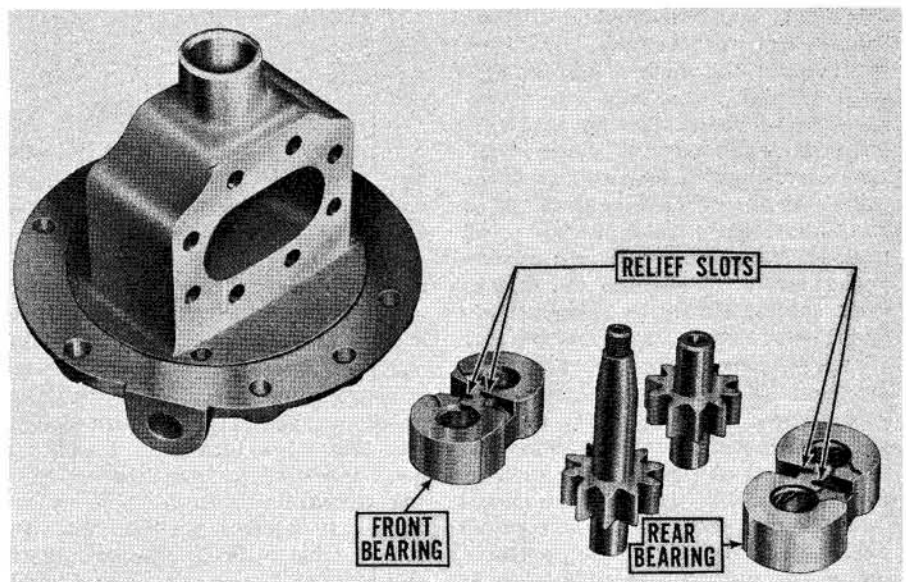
When assembling pump, arrange parts in the order shown, so that front and rear bearings can be identified. Although bearings are very similar, position of relief slots differ in front and rear bearings.
